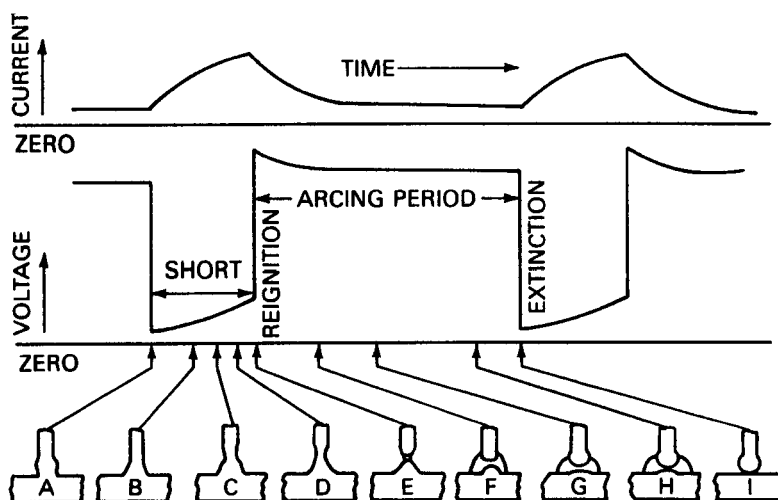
The sequence of events during short-circuiting transfer in a consumable electrode arc welding process: (a) globule of molten metal builds up on the end of the electrode; (b) globule contacts surface of weld pool; (c) molten column pinches off to detach globule; and (d) immediately after pinch-off, fine spatter may result.
